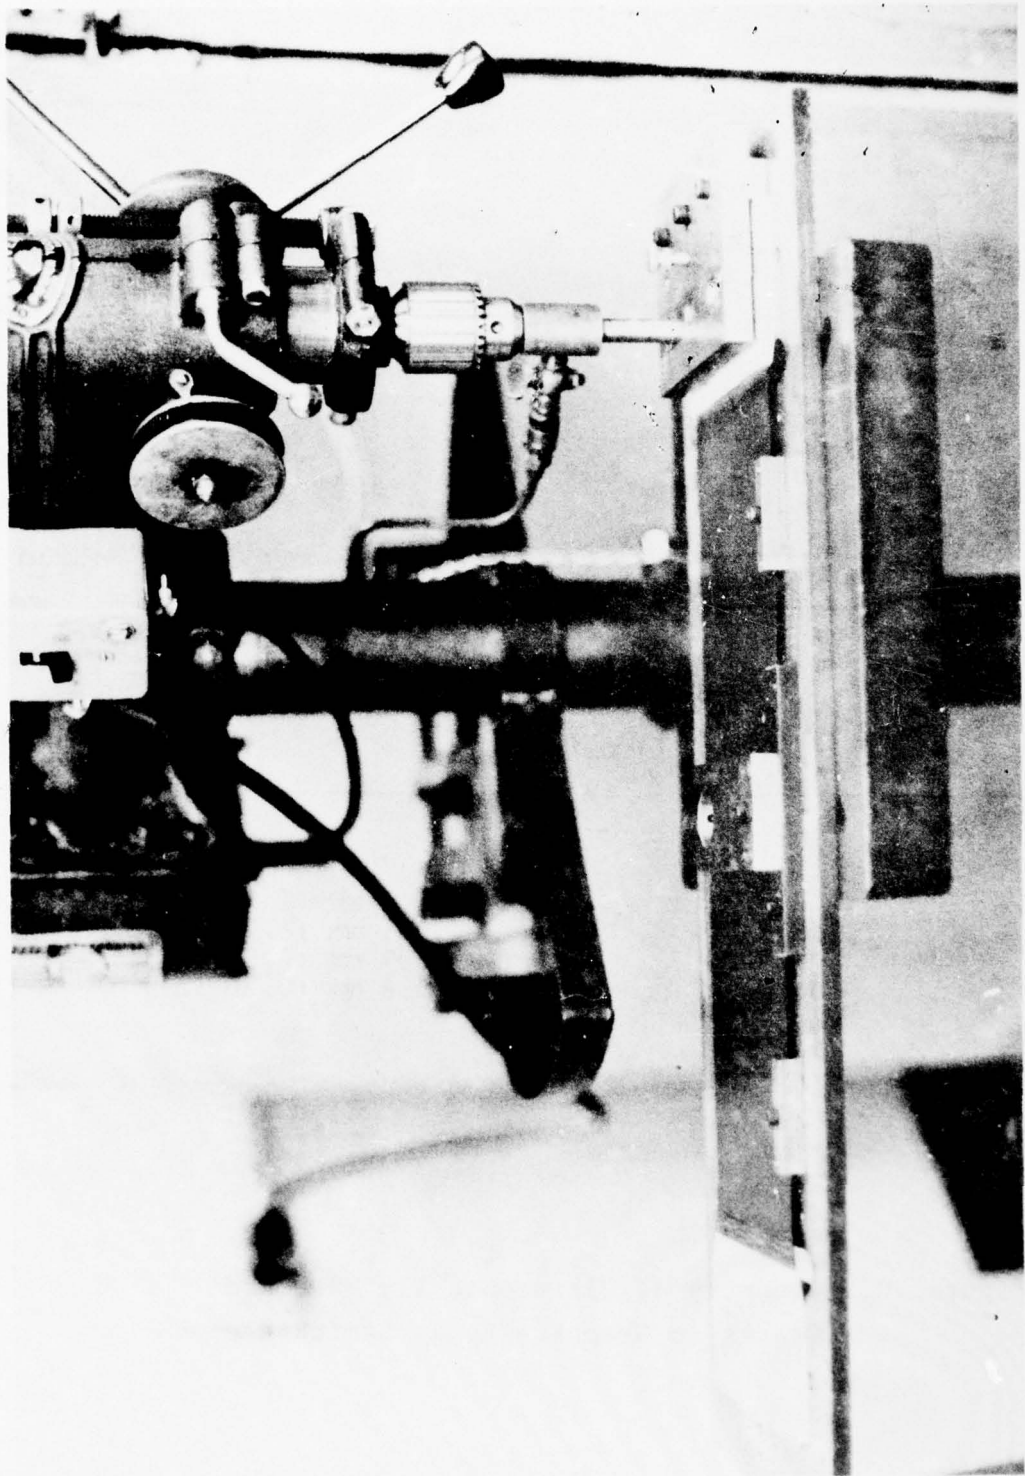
Fixture for Tab Alignment and Drilling of Holes
